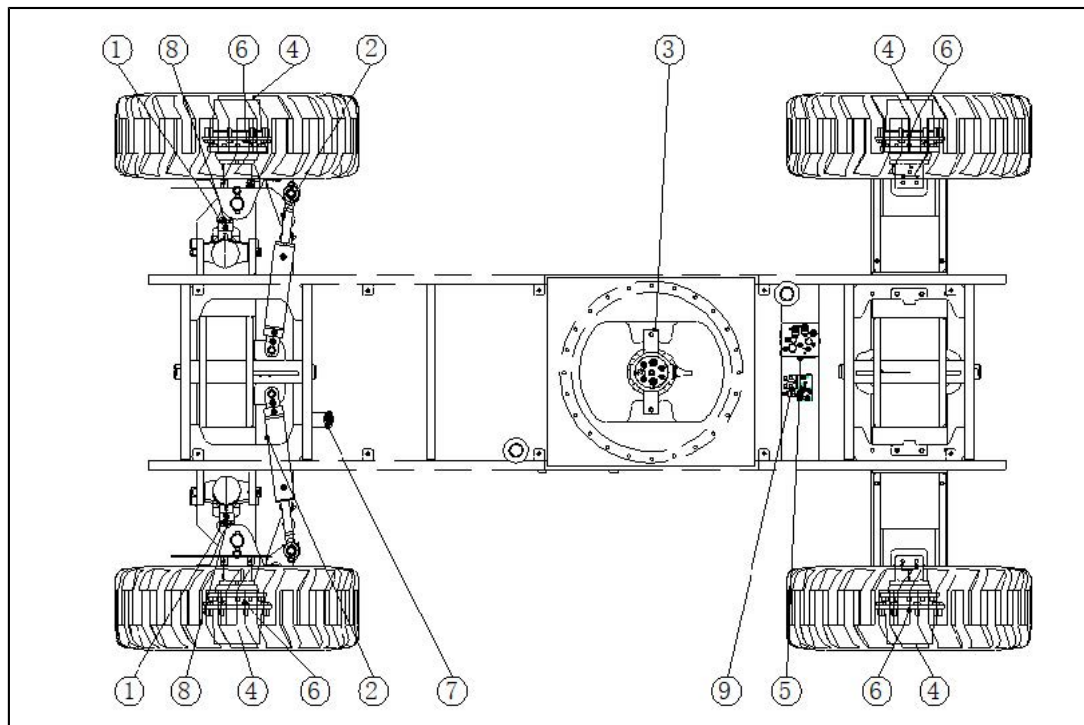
Main hydraulic components of chassis and pressure control valve position
